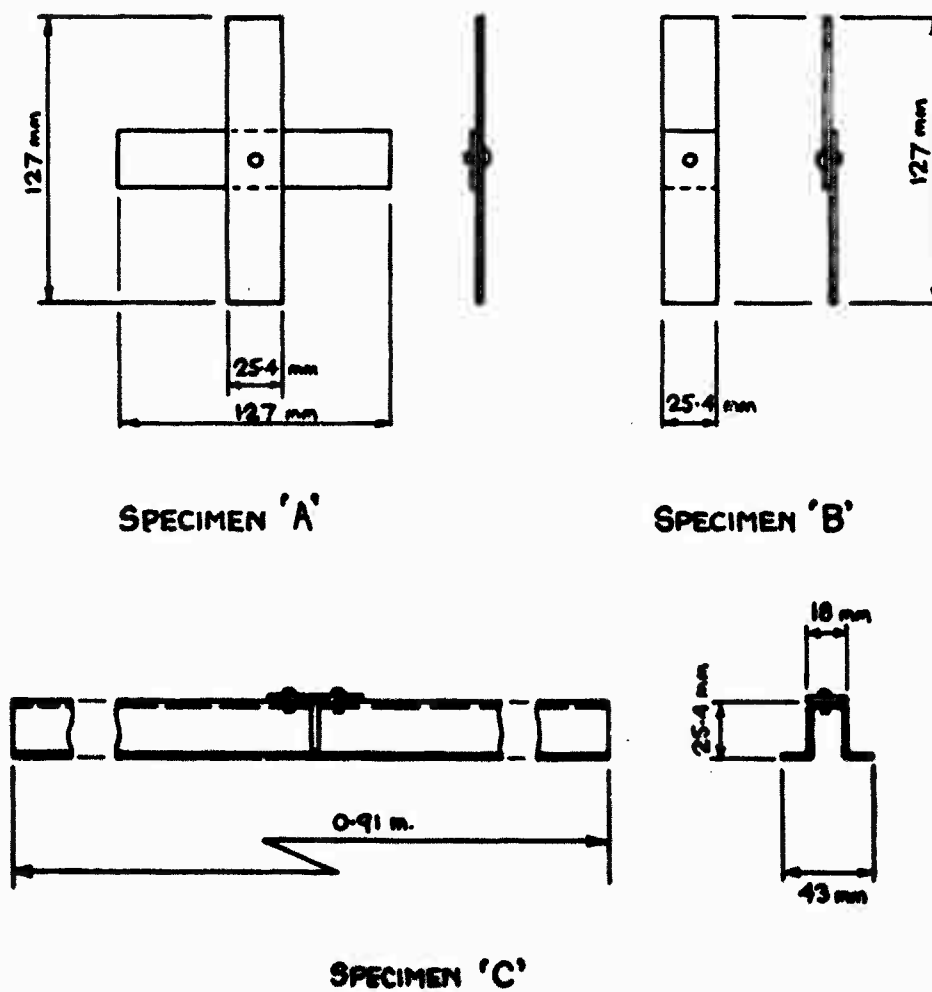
DIMENSIONS OF THE SPECIMENS USED FOR JOINT-DAMPING MEASUREMENTS.
